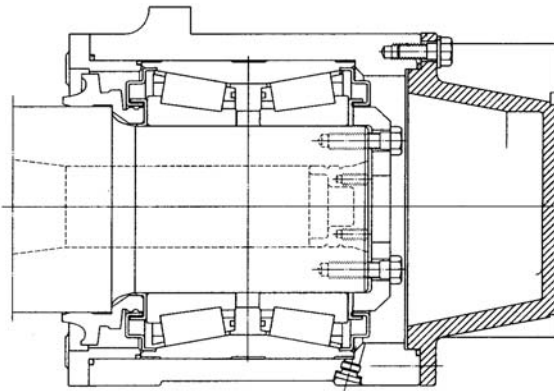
Cross-section of the axlebox 432758 used in Regina, with the bearing BT2B 641157 CB. The TBU is called 1639605 C [SKF, 1999b].
